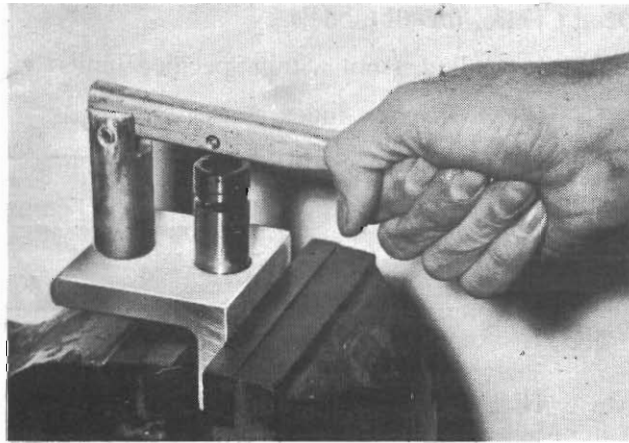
Hydraulic tappet assembly testing by hand, using Tool E9C40C
